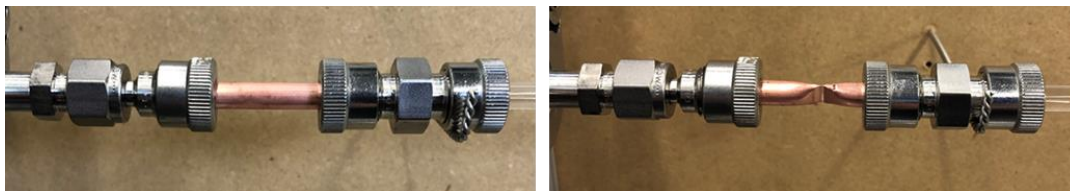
Un-crimped (left) and crimped (right) copper tube.
